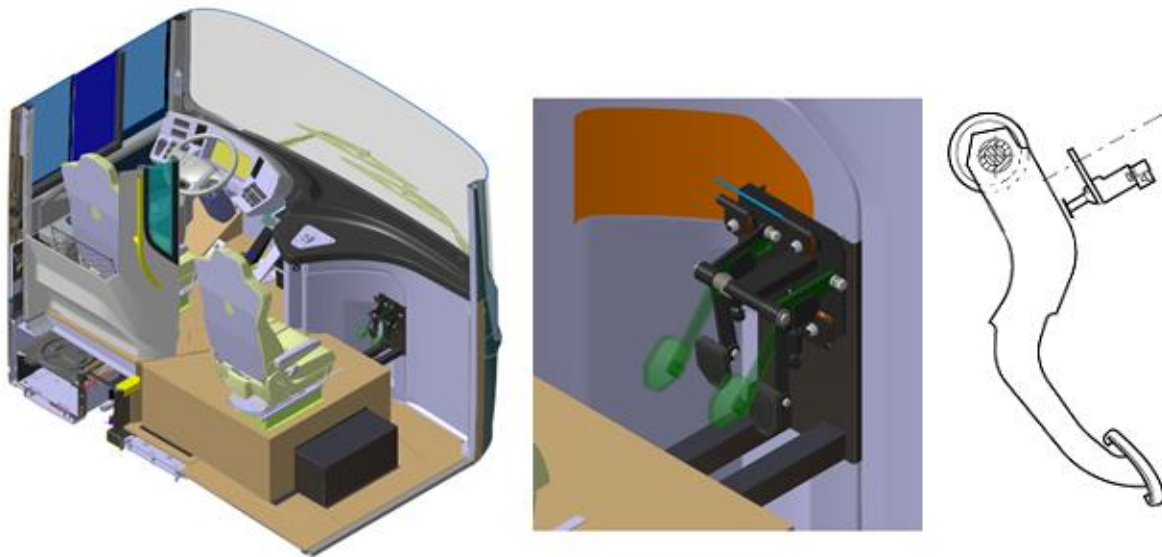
a) Pedals mounted on platform. b) Detailed pedal placement and wire burn through. c) Pressure sensor fitted to pedal.
